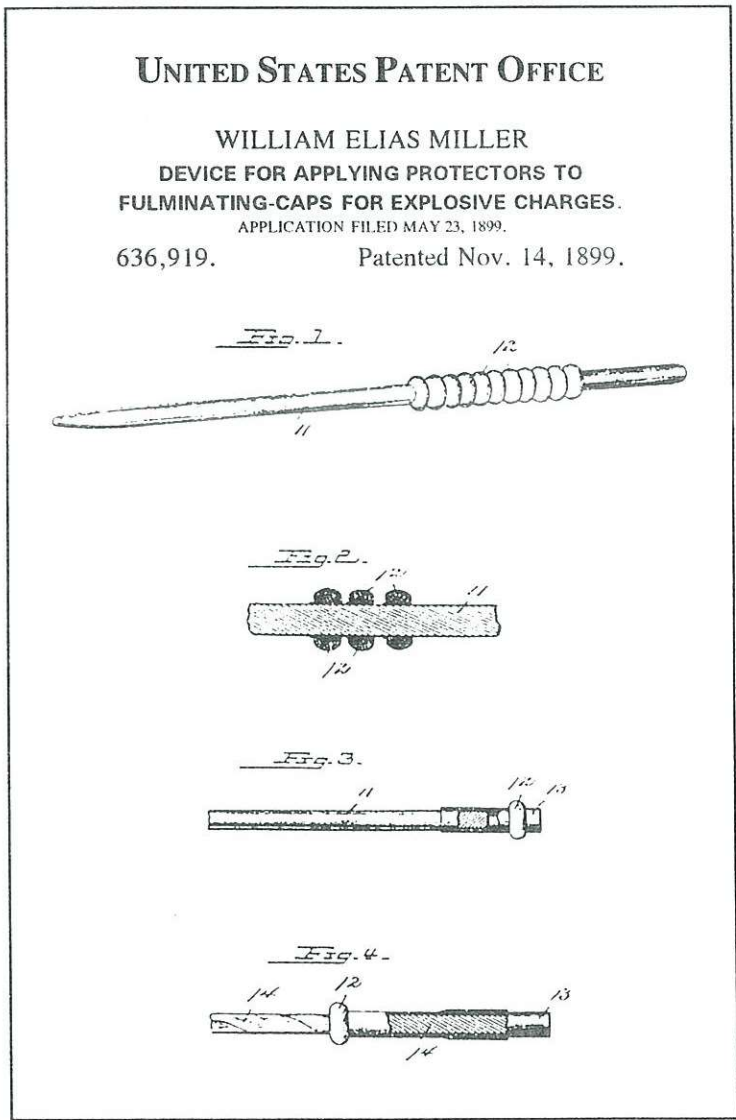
The patent drawings for William Miller's blasting cap protectors patented in 1899.
